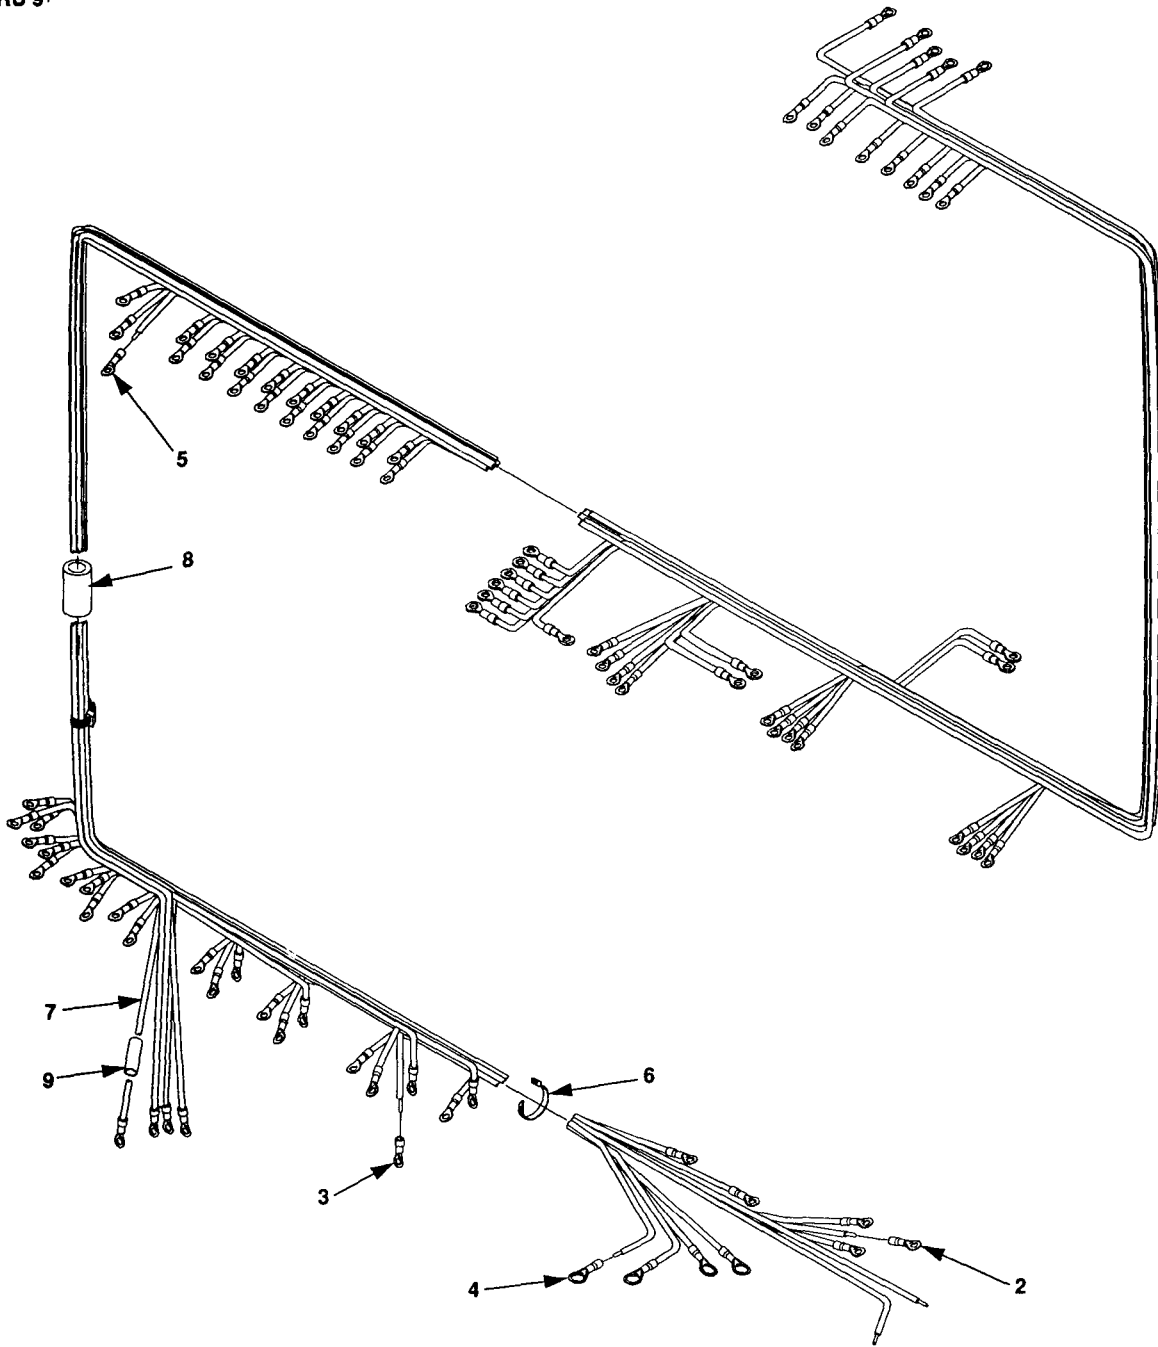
Switch Box Harness Assembly (Sheet 1 of 2)
